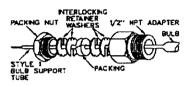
Part No. FTG13A-600R packing nut assembly. (Use with Style 1 bulb with support tube for direct immersion application.
